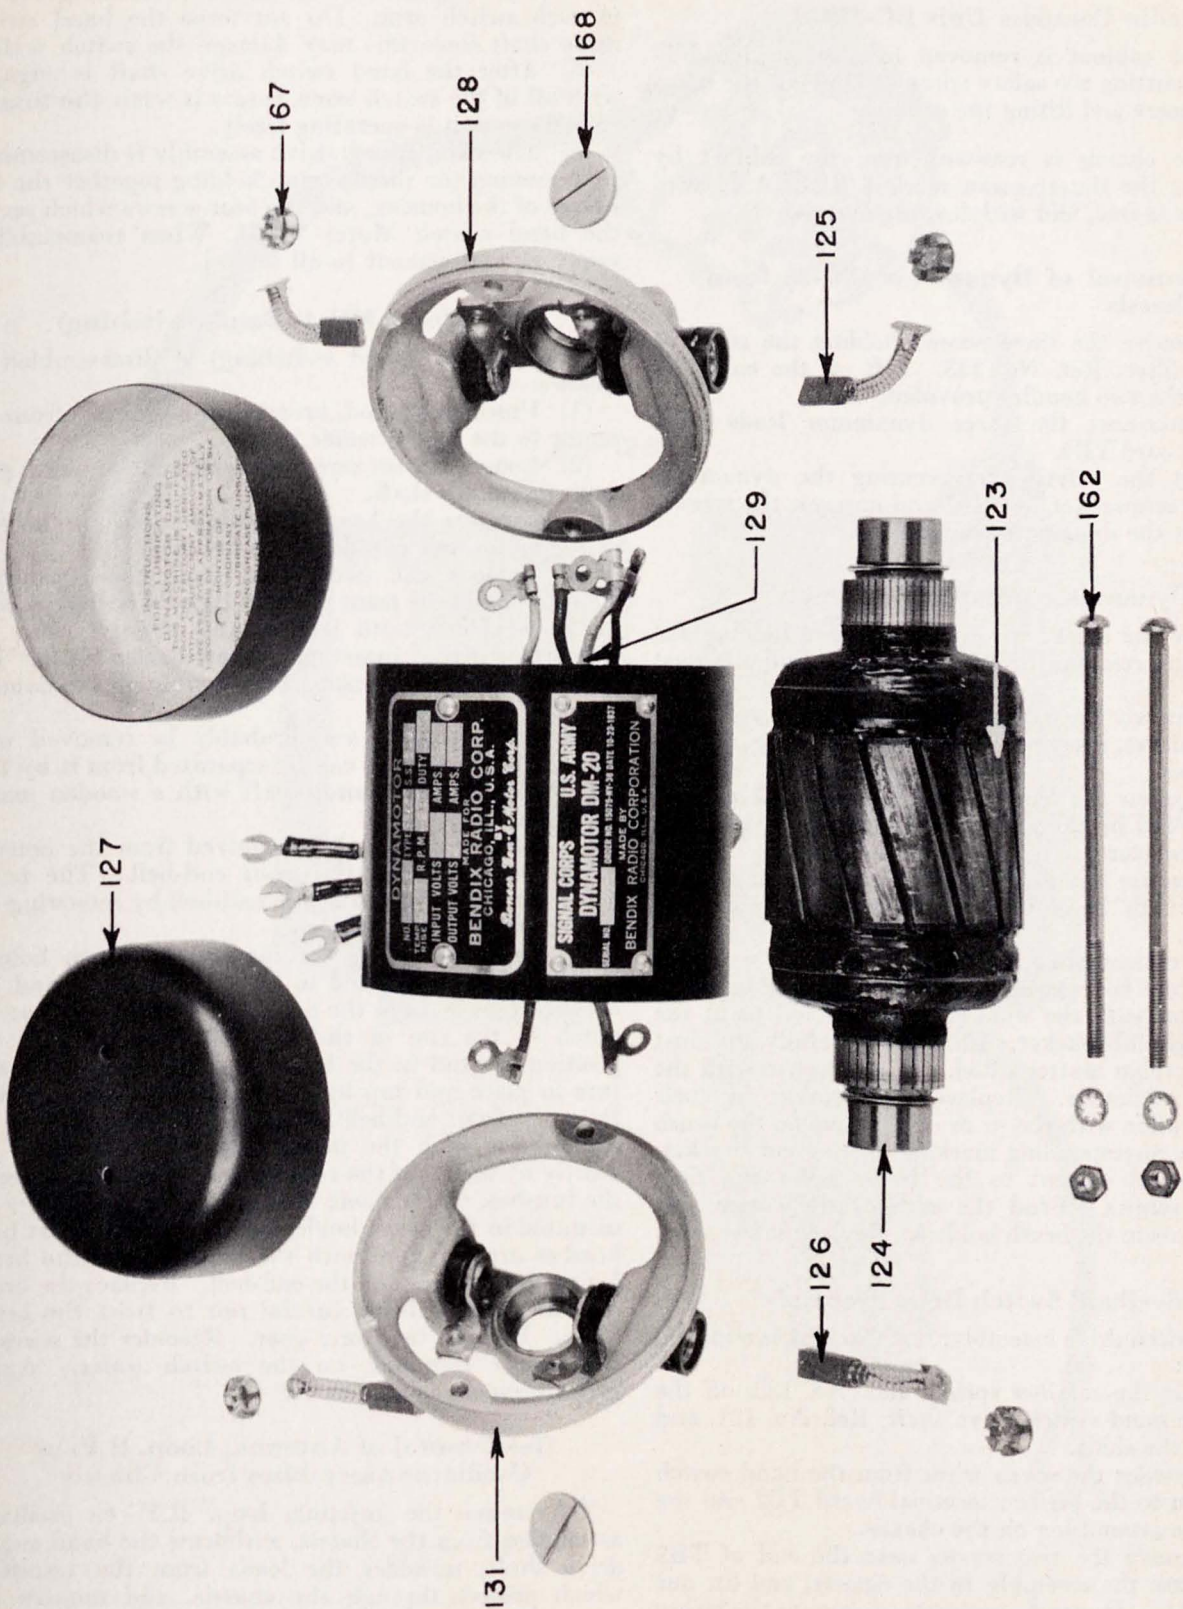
DYNAMOTOR DM-20, EXPLODED VIEW
